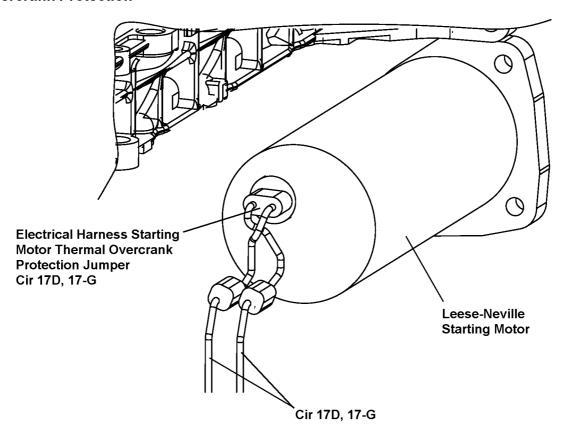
LEECE-NEVILLE Crank Motor with Thermal Overcrank Protection
